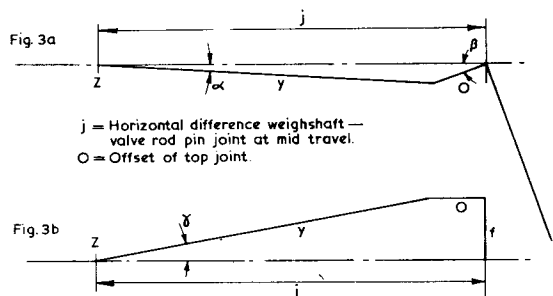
A shows the gear at the position where the die block axis and weighshaft axis coincide, i.e. the piston is at top or bottom dead centre. In this case
